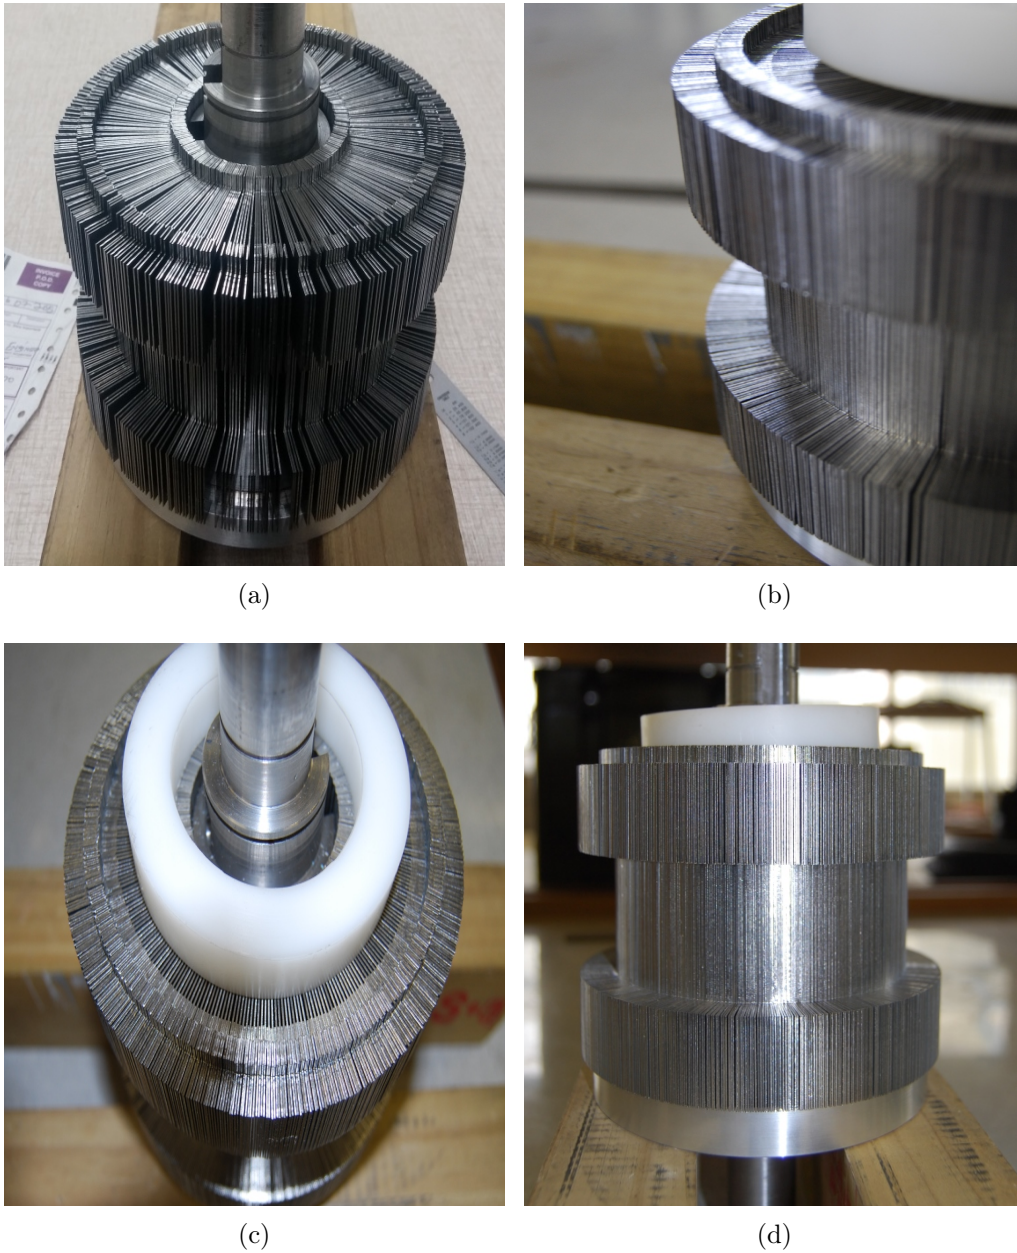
Secondary core assembly: (a) Before additional laminations are placed (b) side view, (c) top view, (d) full view
